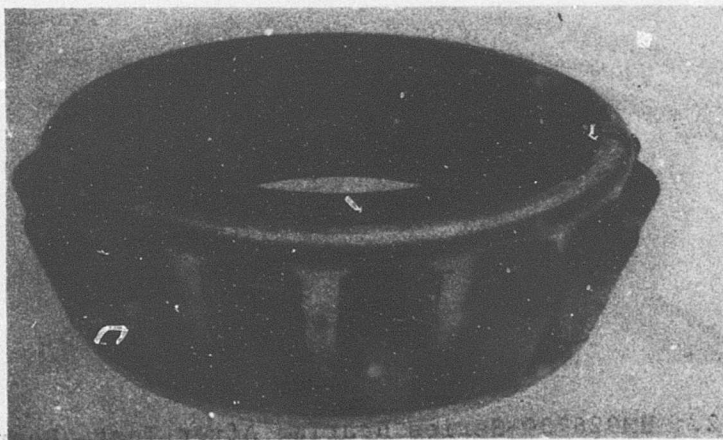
HM926700-Series Bearing After Test, Bearing No. 10, Test No. 15--Damaged Due to Test Assembly Problem.
